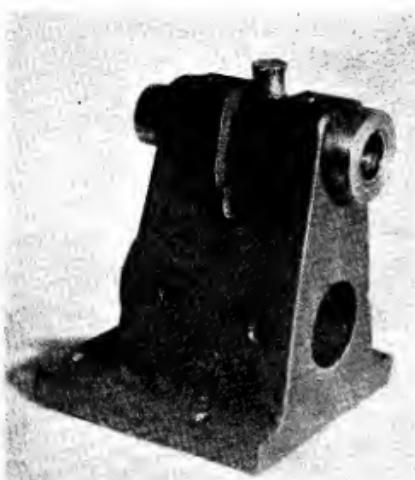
Headstock of 1½-in. centre lathe. Bush and lubricator were fitted at a later date when it was used as an emery grinder
